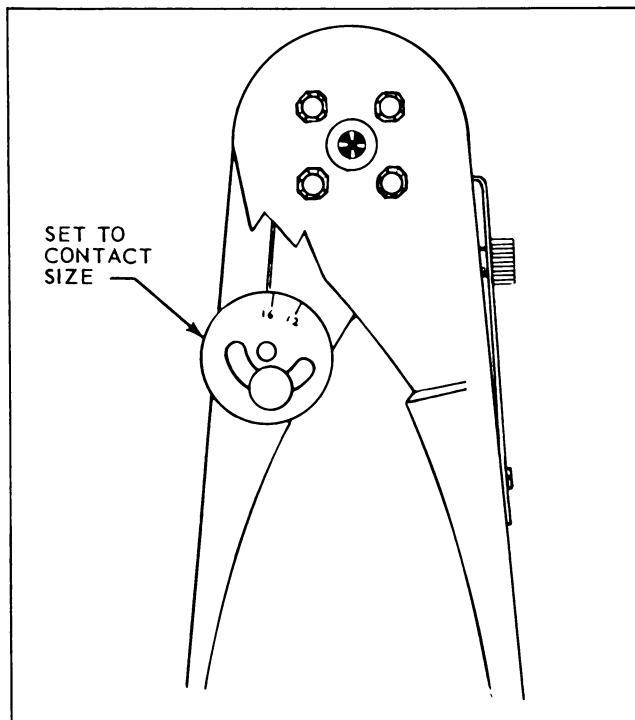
Adjustment of Bendix Scintilla 11-3284-1 Crimping Tool for Contact Diameter
